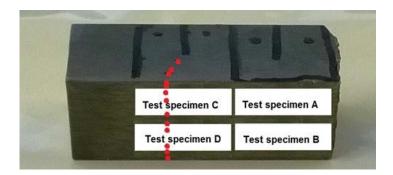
Miniature C(T) specimens were cut from tested CVN specimen halves as sketched above. Red dash line points out the fusion line of the weld.
